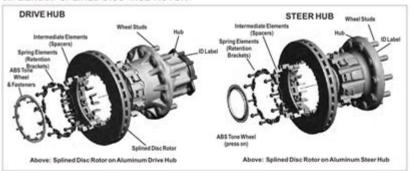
SPLINED DISC ROTOR EXAMPLES - EXPLODED VIEWS
